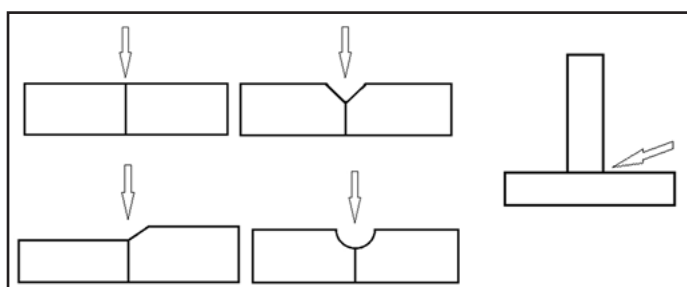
Examples of joints used in hybrid laser welding [9]
